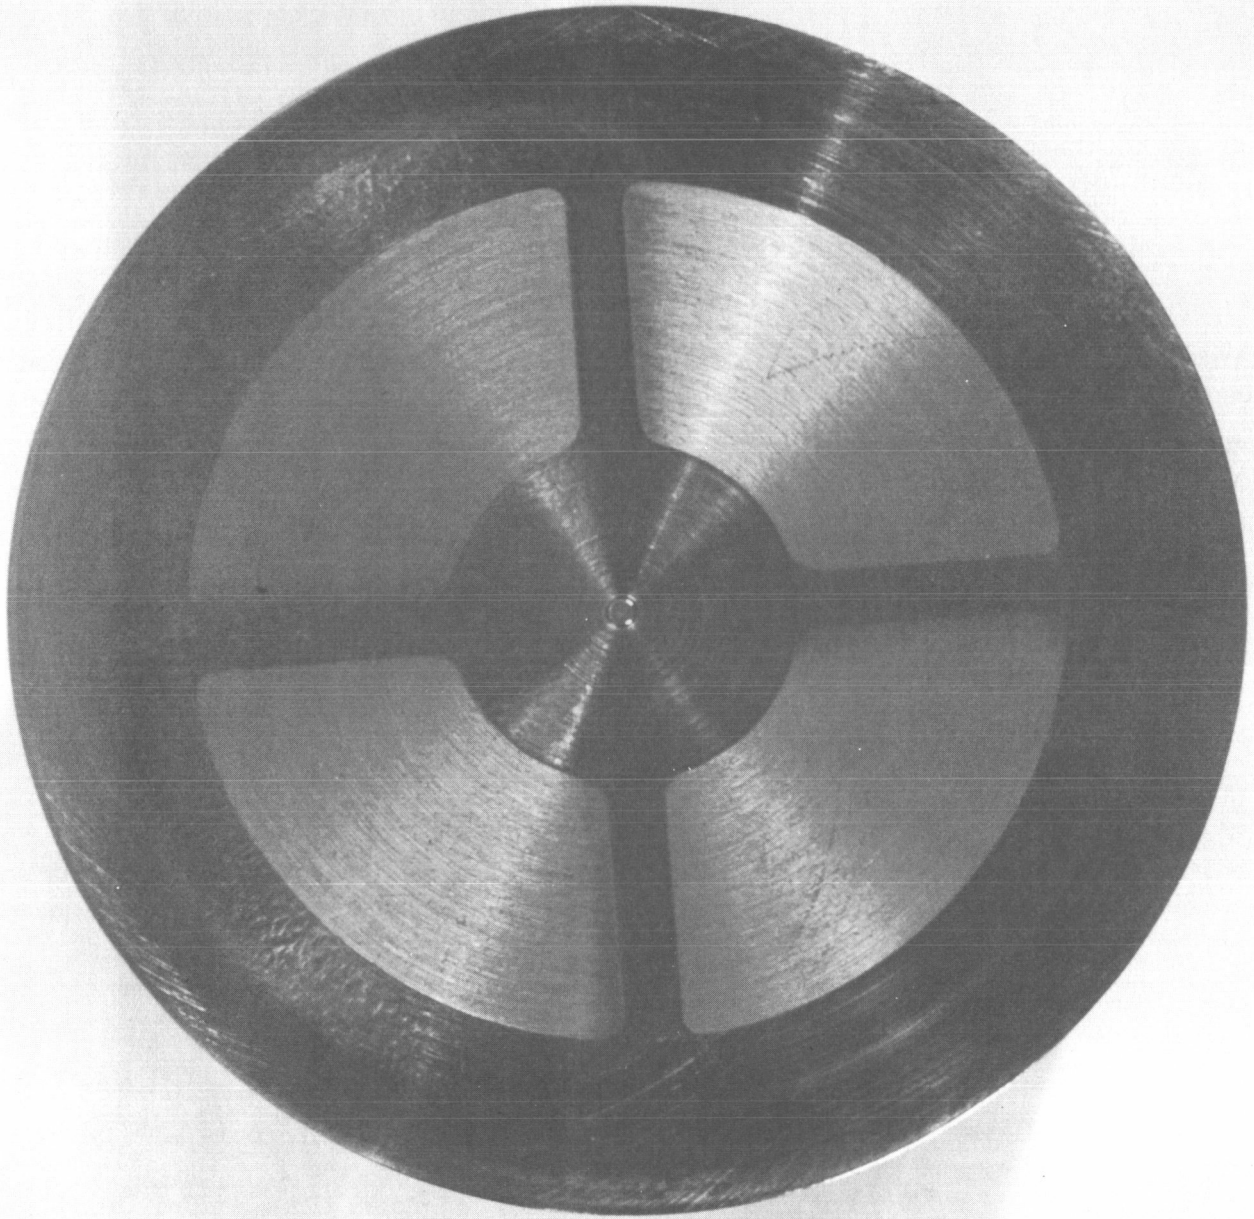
Test Sample After Clean Up Machining - Inlet Eye View
